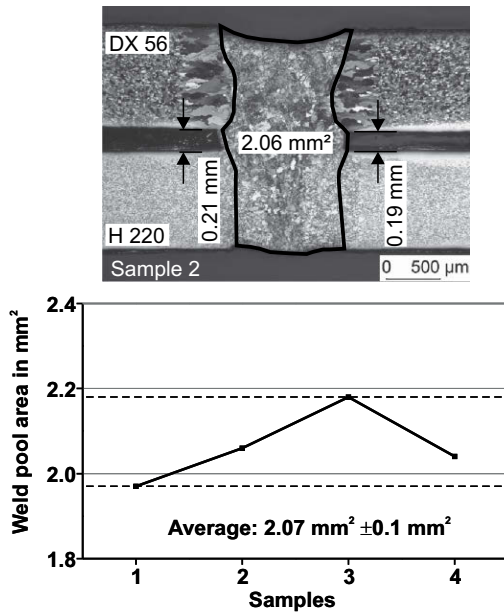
Experimental scatter band of the fusion zone area in cross-section, simplified geometry “overlap weld”, laser beam welding, sheet thickness 1 mm, $q = 3.3 \text{ kW}$ and $v_s = 300 \text{ cm/min}$
